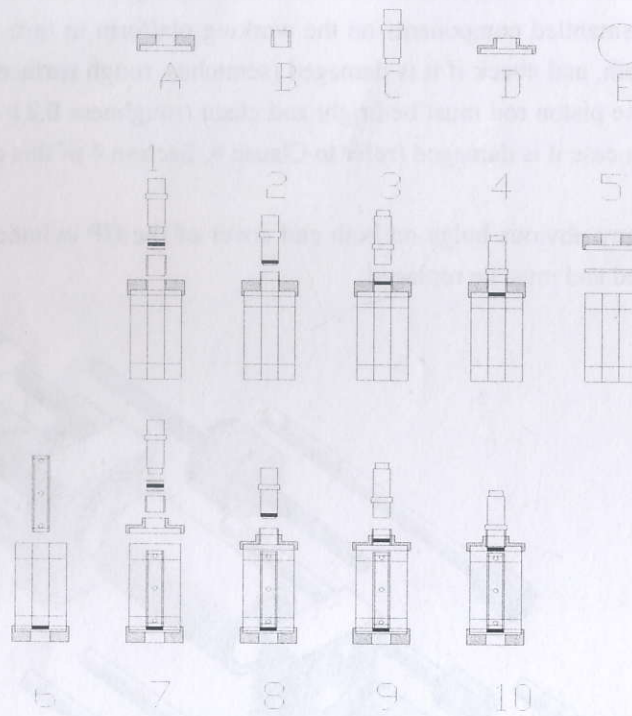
Sketch drawing for HP Seal Ring Assembly Procedure
